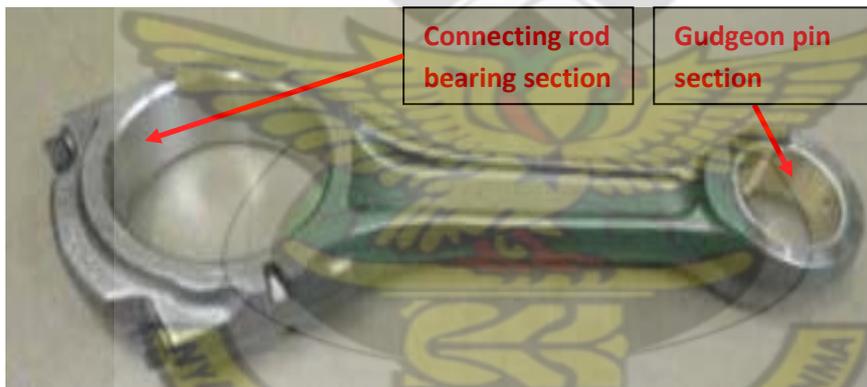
Connecting rod with the bearing and gudgeon pin sections
